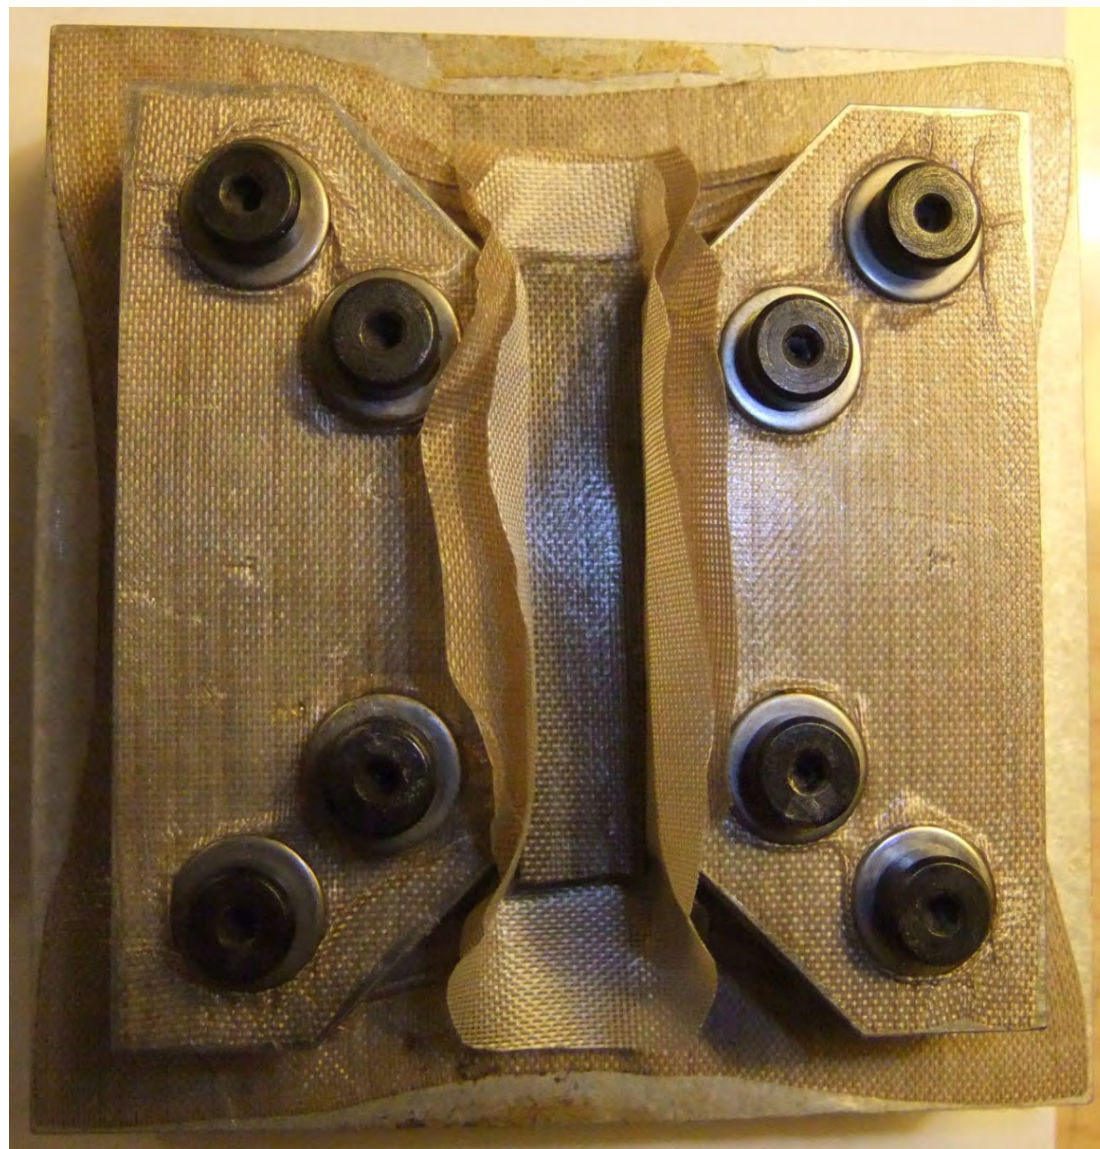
, Bottom Graphite Tooling Plate Insertion Top View
